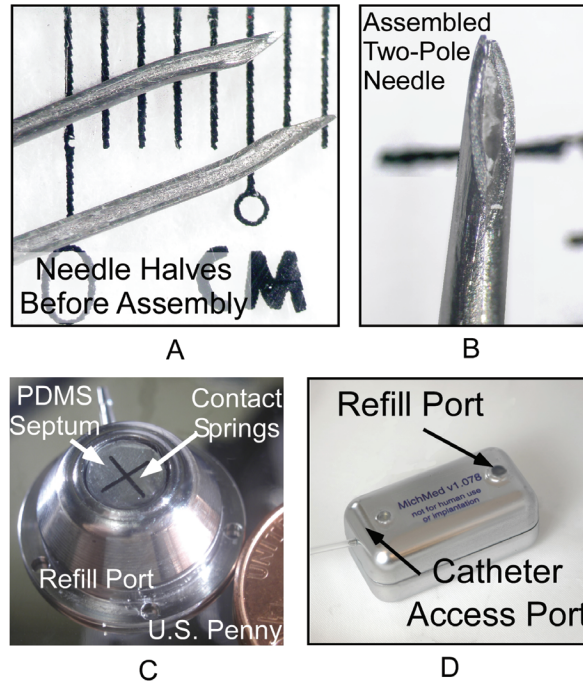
(a) Photographs of 26 gauge coated needle halves before and (b) after assembly taken on a white ruler. (c) A photograph of an assembled refill port in which the top contact spring of the septum is clearly visible. The port is pictured here with a US Penny. (d) An implantable drug delivery device with the refill port and a similar catheter access port.
